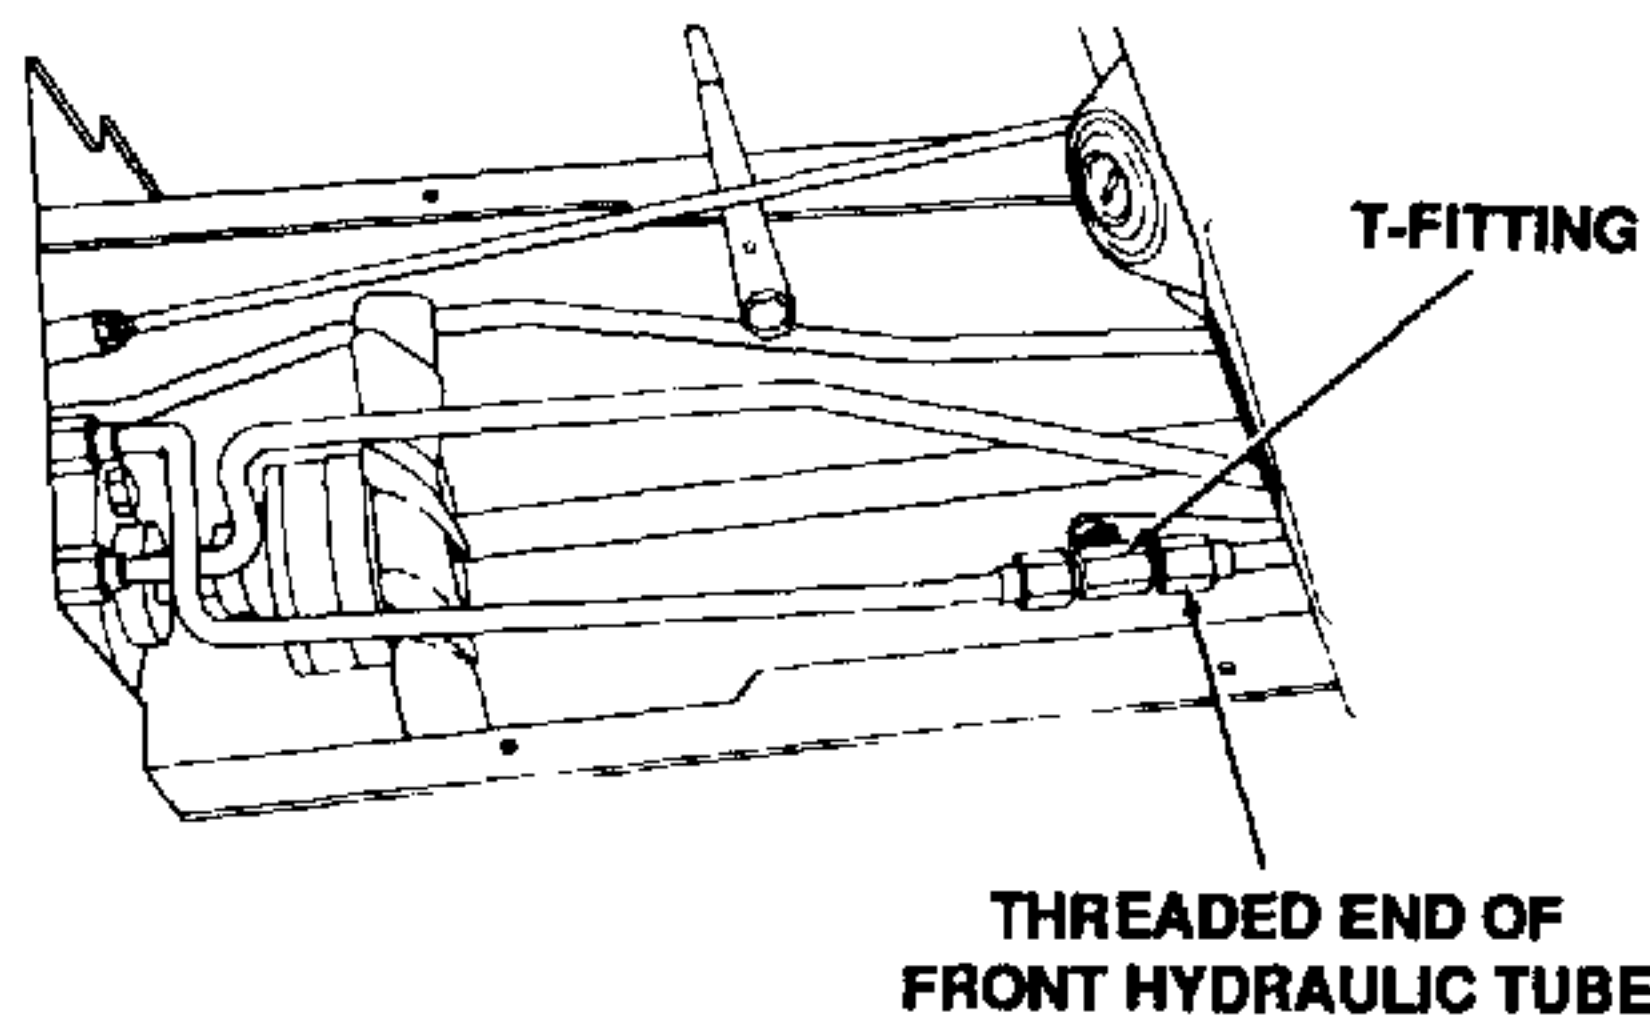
Final Installation of Front Outlet Tube (Models 1862, 1782, 1882, 2082 and 2182 Only).
